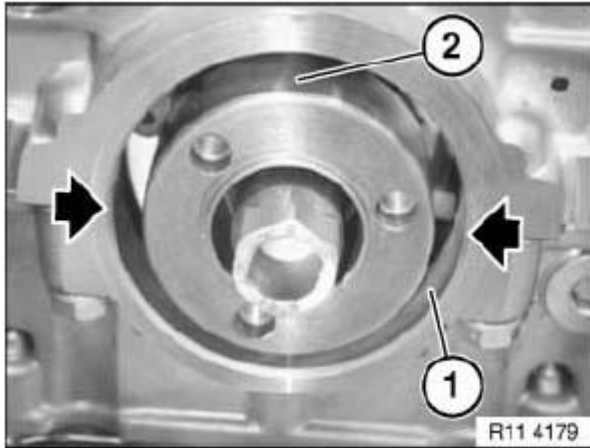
Identifying Shaft Seal And Radial Shaft Seal Running Surface
